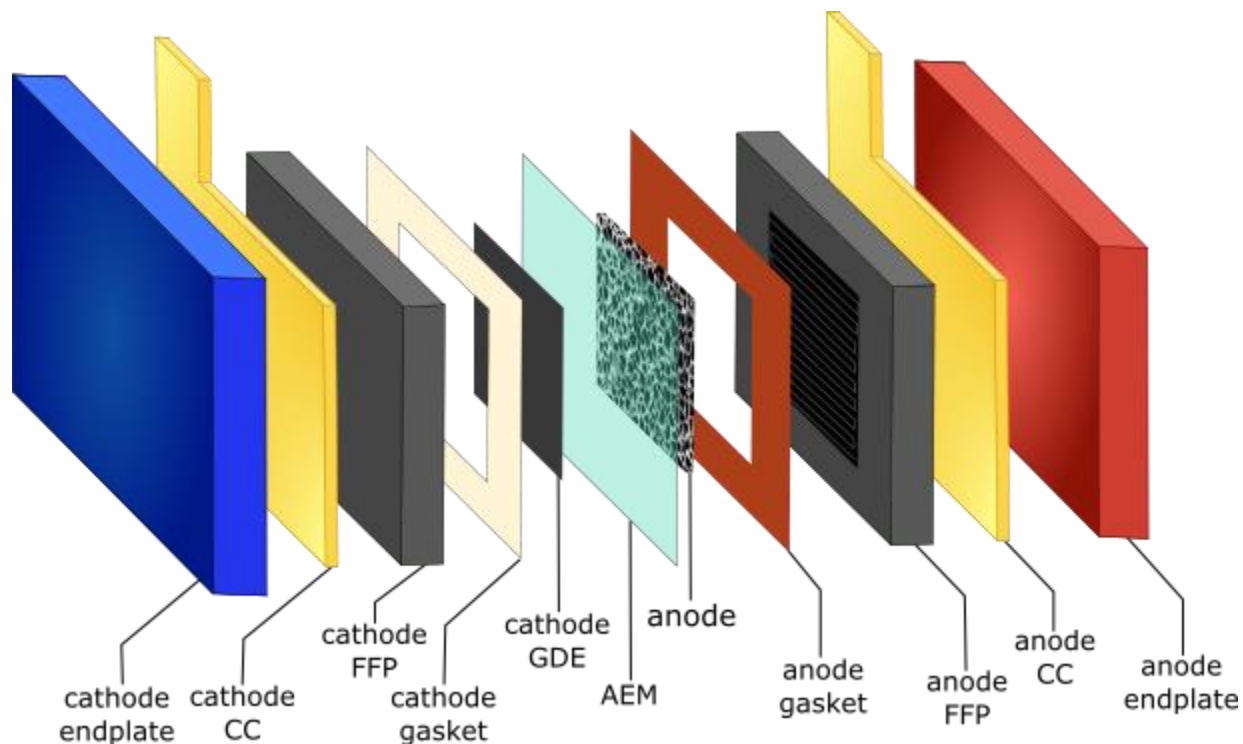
An exploded view diagram of the URC depicting all components and their mounting order. Machined bolt holes and reactant inlet/outlets in each
